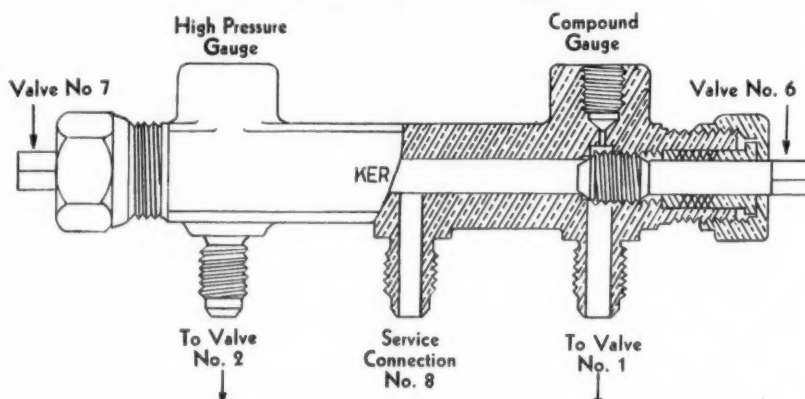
Combination gauge set cut away to illustrate construction and marked to show connections to system.
